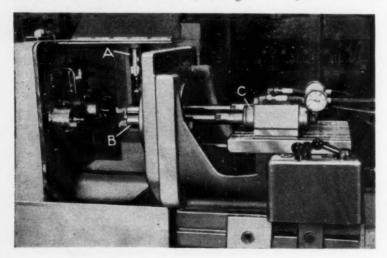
This Drebomat 2-spindle Fine-borer, Employed for Machining Drill Gun Bodies, is Equipped with a Pneumatic Drill at A
